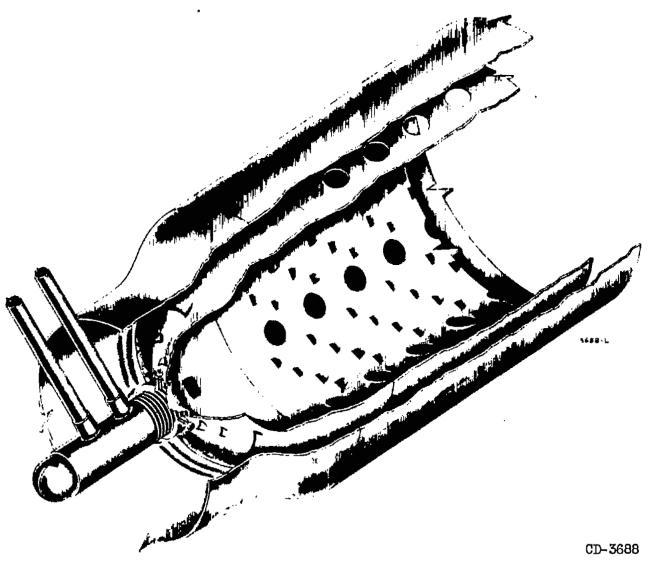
Diagrammatic sketch of combustor showing method of attaching liner to nozzle.
